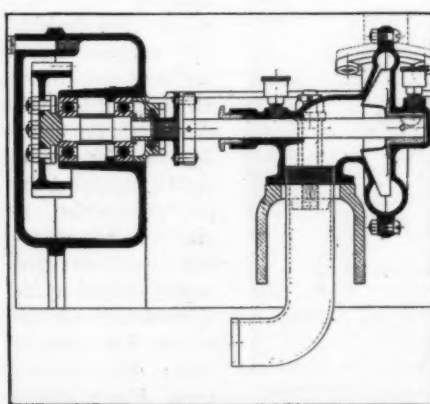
Section through the water pump and drive, showing the stub shaft mounted on annular type ball bearings and the design of the safety joint
